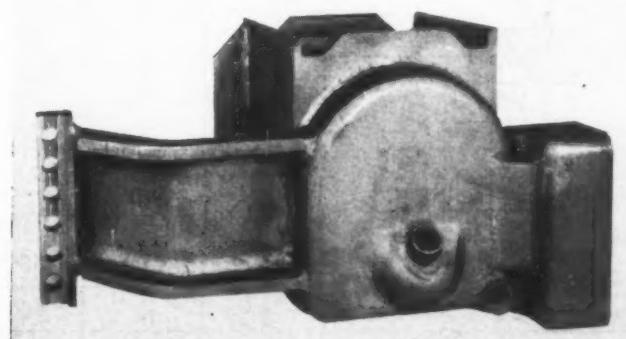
A journal box which is made from four forgings which can be automatically or manually welded together
